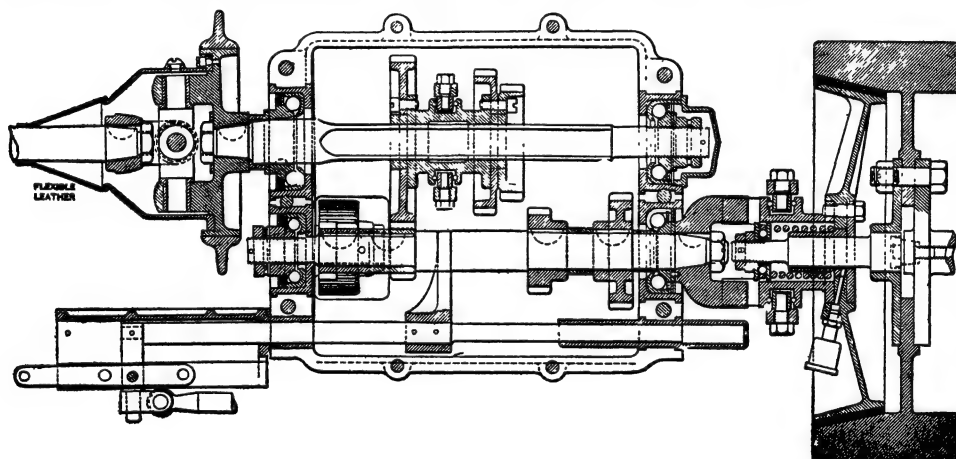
CONE CLUTCH (to the right), SLIDING GEAR MECHANISM
